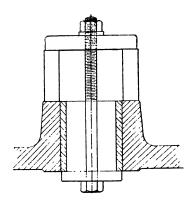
METHOD OF REMOVING BUSH WITH NUT AND BOLT
